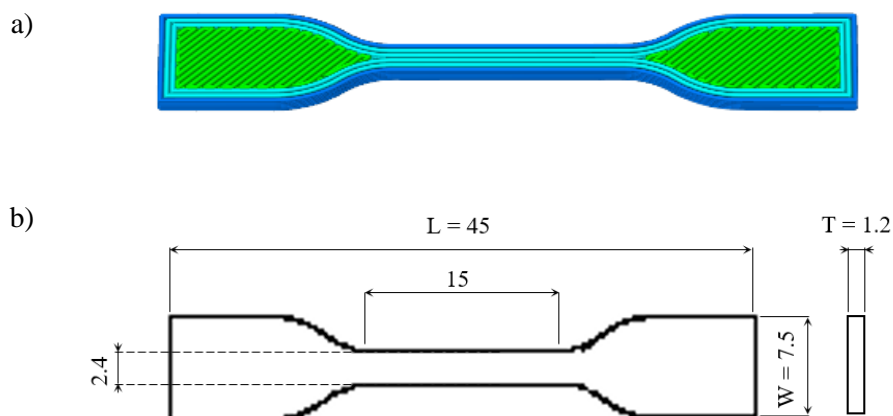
a) 3D model of imported dog-bone design and b) dimensions (in mm)
